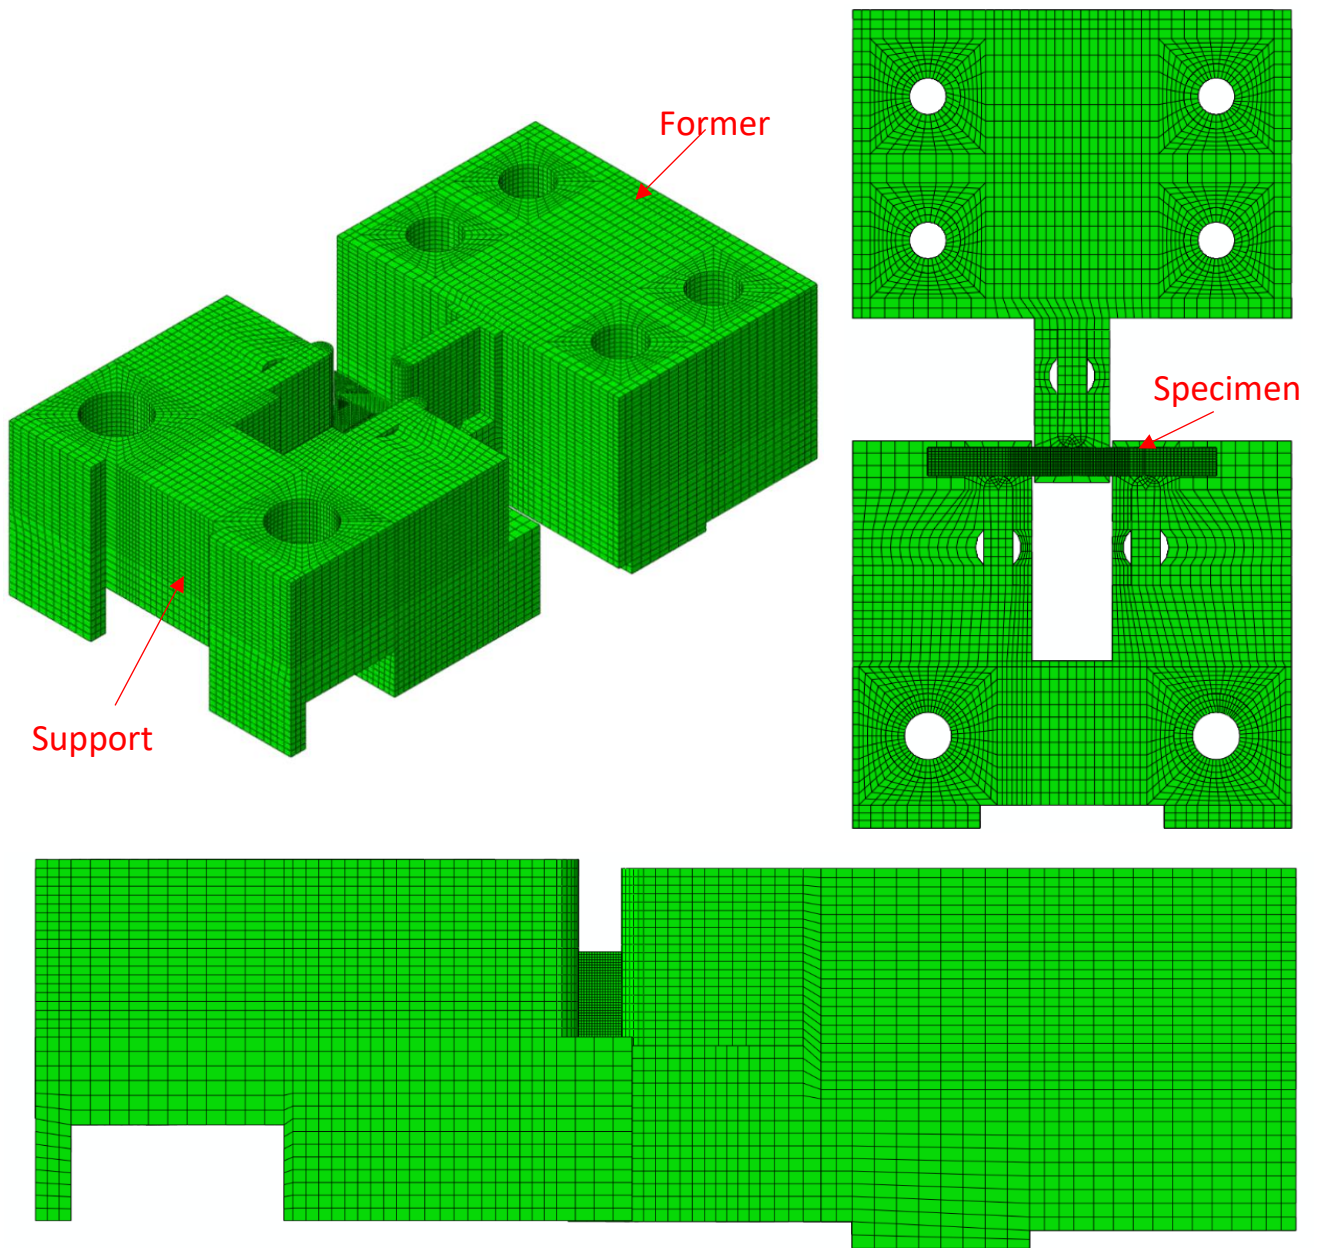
Views of the meshed 2nd generation 3 point bend test tooling and specimen assembly, top left is the orthogonal view, top right is the top view, bottom is the side profile.
